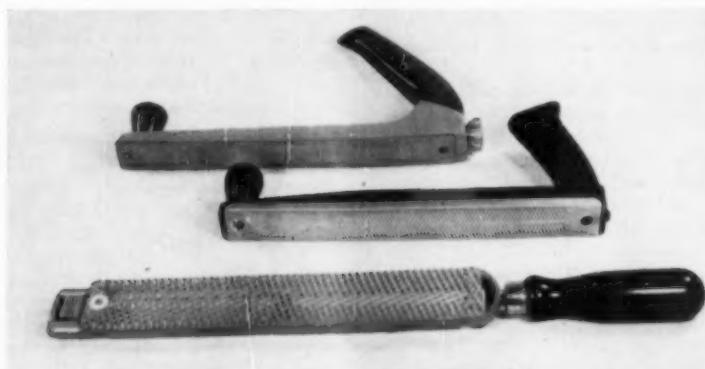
Top to bottom: Plane 'R File, with its handle in the plane position; the plane-type Craftsman Rasplane; and a Surform file-type tool.
